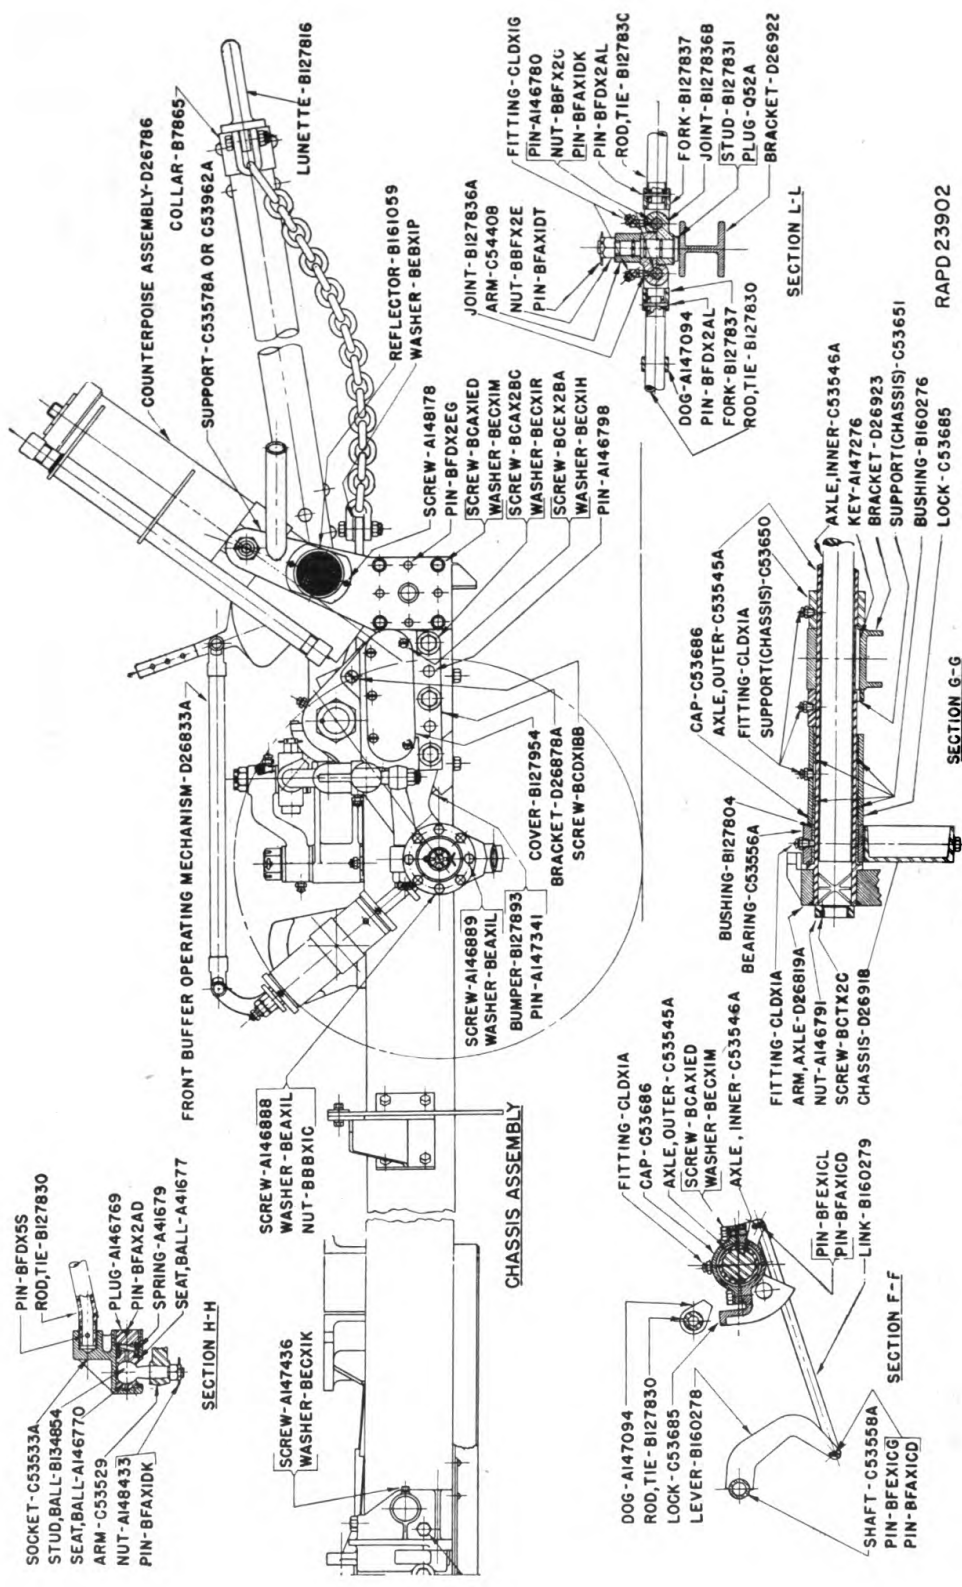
Chassis assembly (pertains to figs. 2 and 3).
